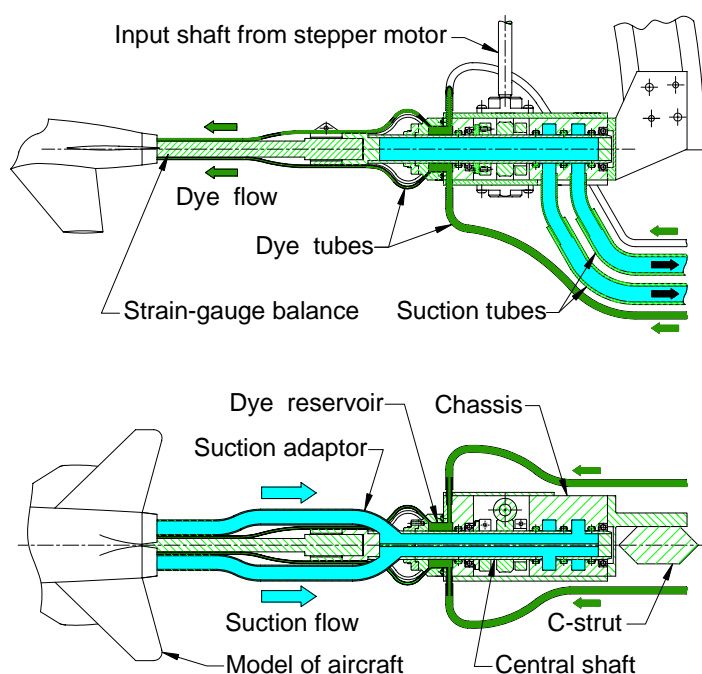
Cross-sectional side- and plan-views of the roll mechanism.
